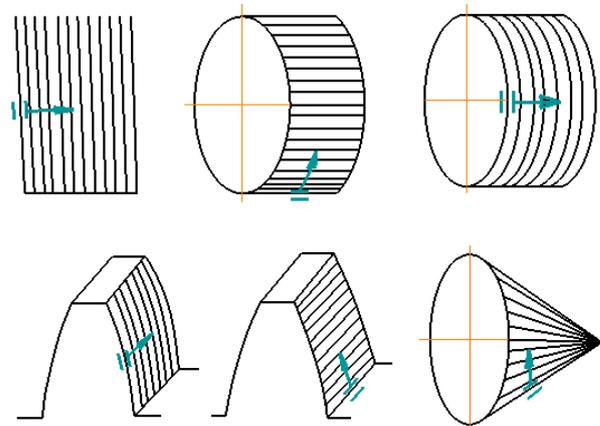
Patterns for the formation of surfaces of the parts by cutting
